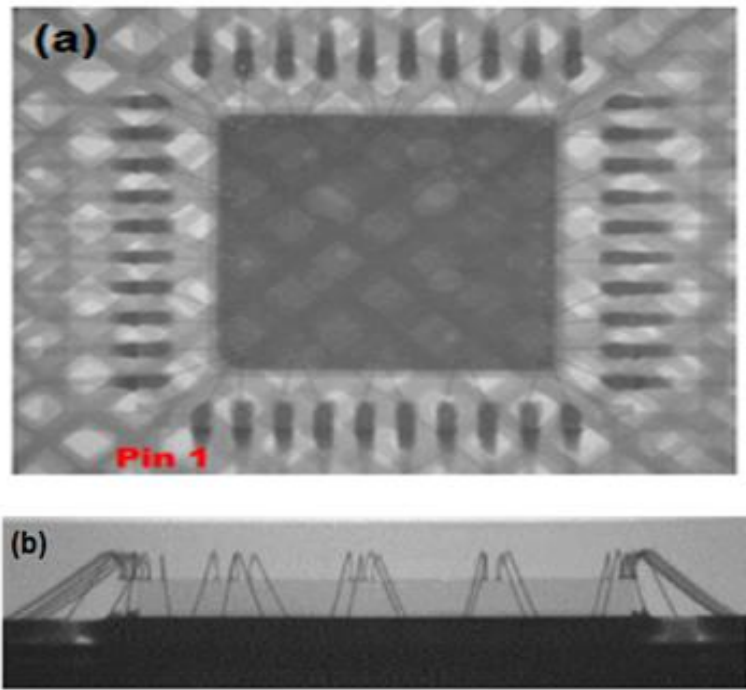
X-ray of assembled package (a) Top view (b) Front view
